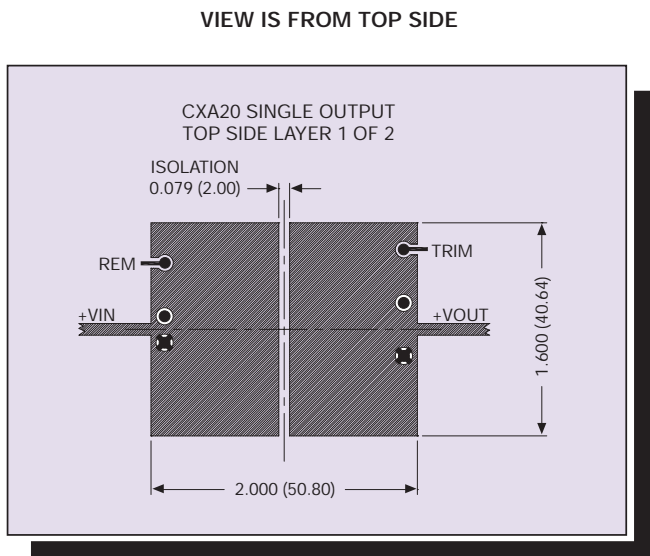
Optimum PCB layout for EMC and Thermals for single outputs on a single-sided PCB.
